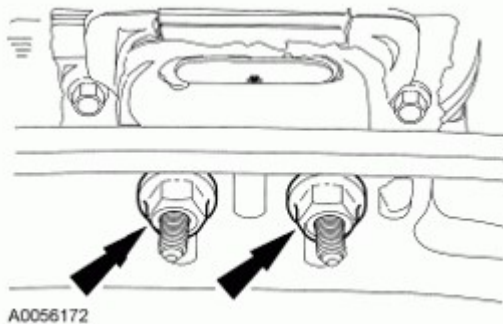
Locating Rear Transmission Insulator And Retainer Nuts
